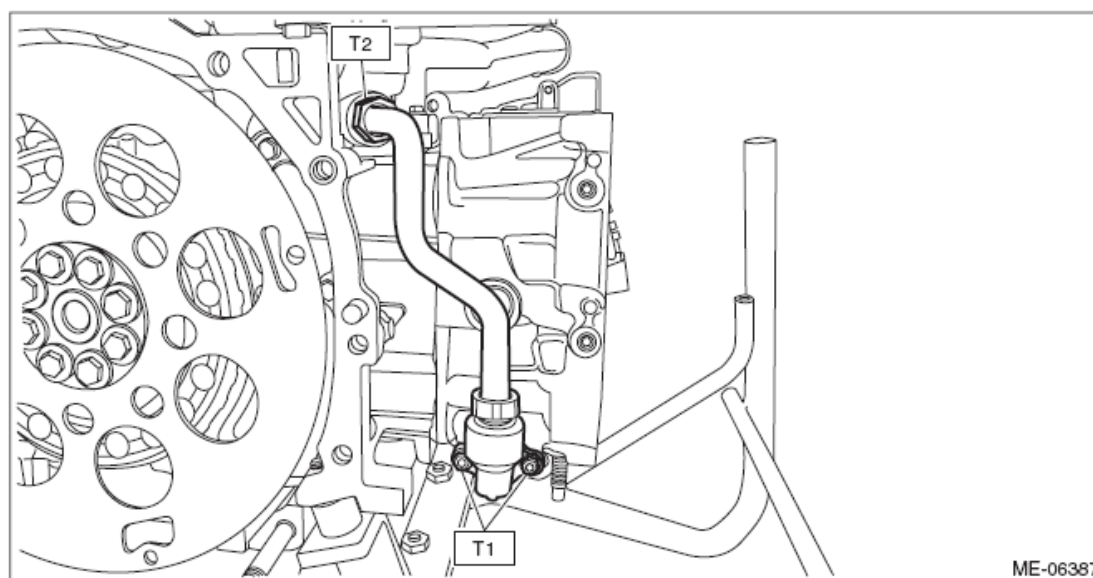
Installing EGR Pipe To Water Pipe Assembly
